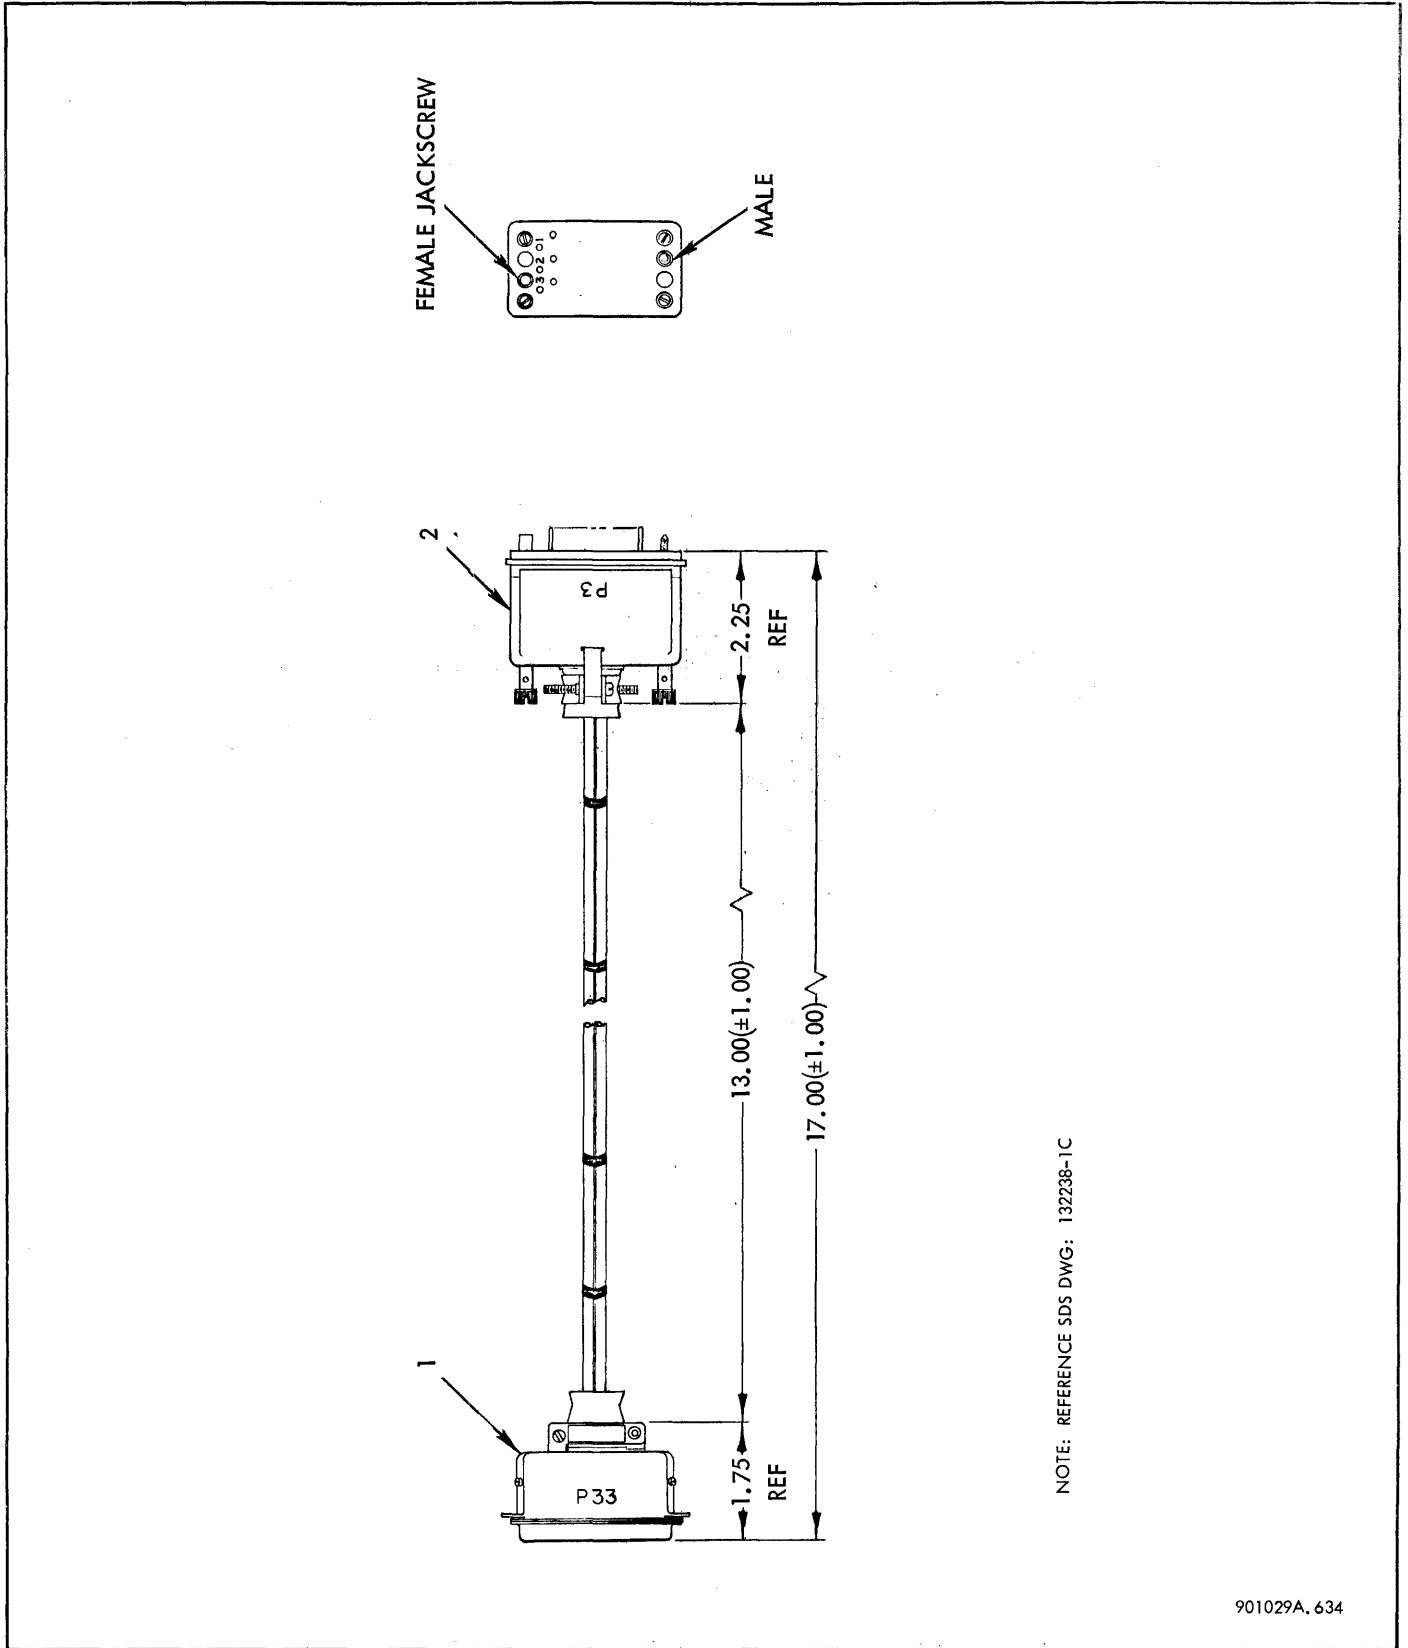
Plug Mold to Power Supply Cable Assembly Parts Location
